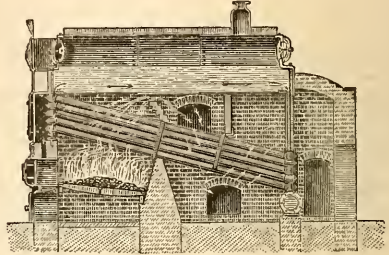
Babcock and Wilcox's Sectional Boiler.
